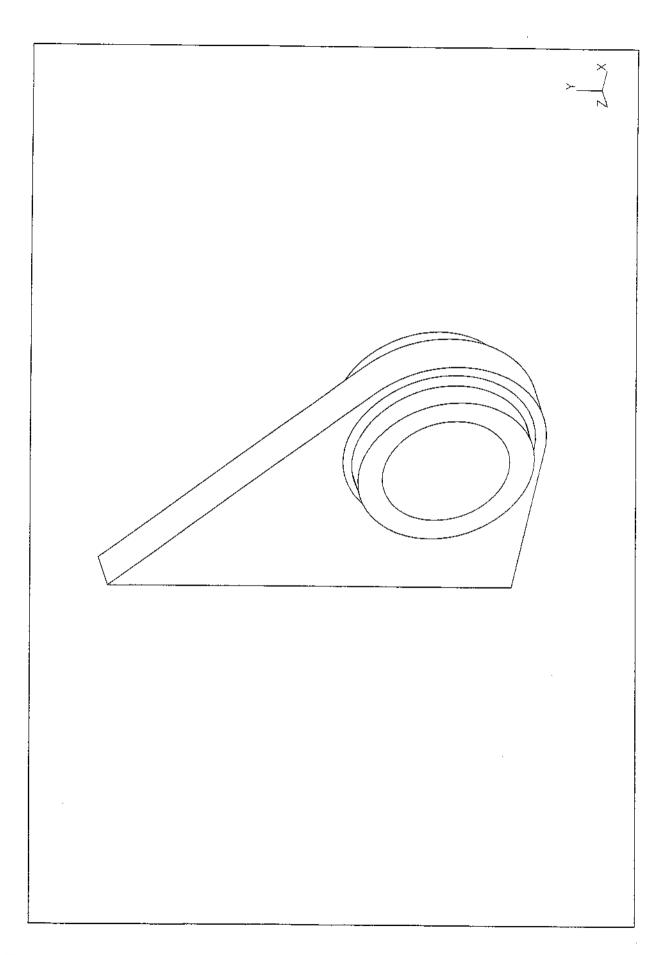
Geometry of the whole structure: hinge plate, sleeve with welds and shaft.
